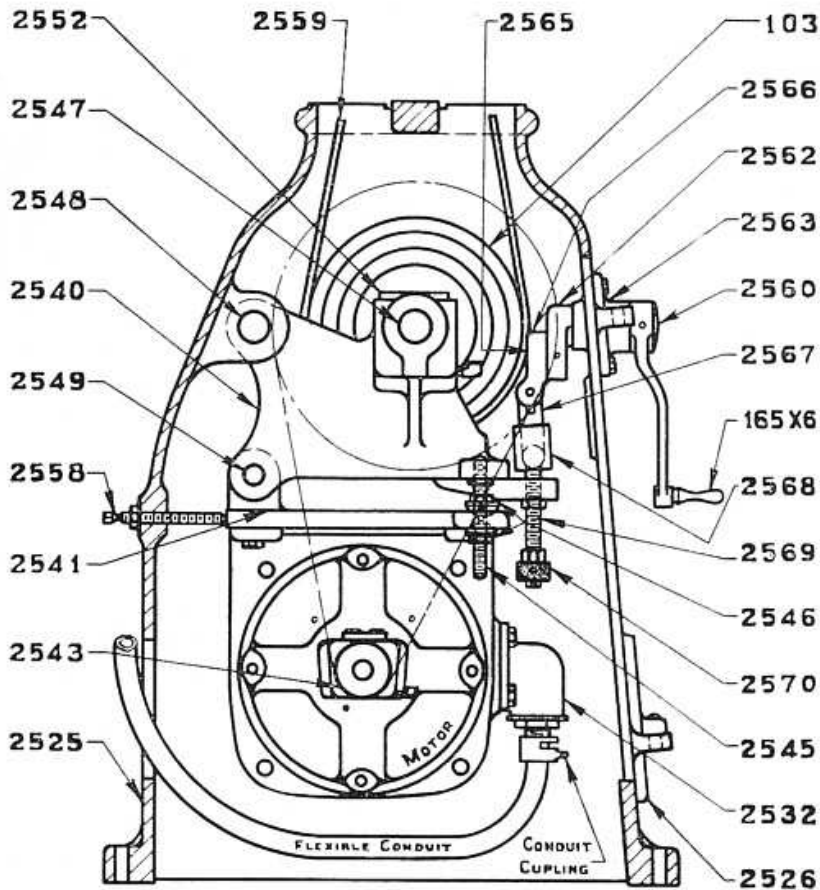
End View Drawing Showing Position of Parts of Underneath Belt Motor Drive Unit in Assembly.
